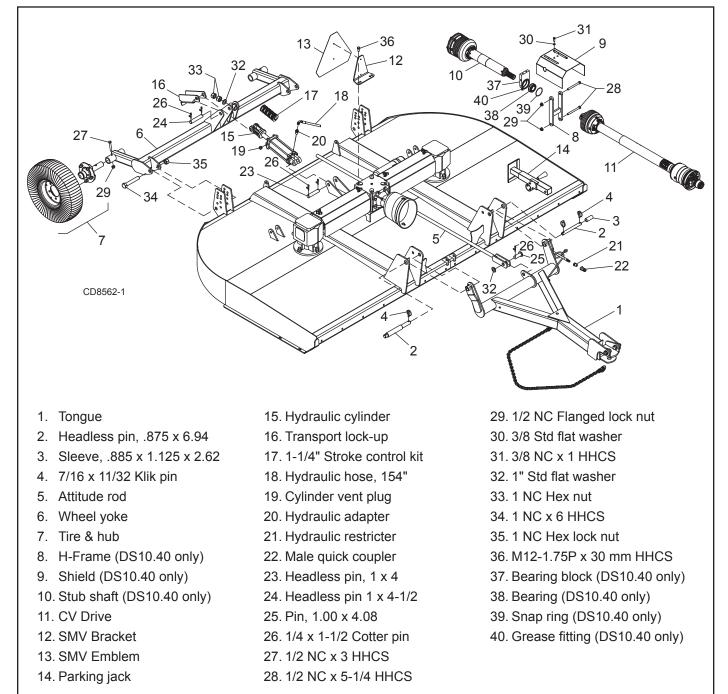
DS8.30 & DS10.40 Pull-Type Assembly
